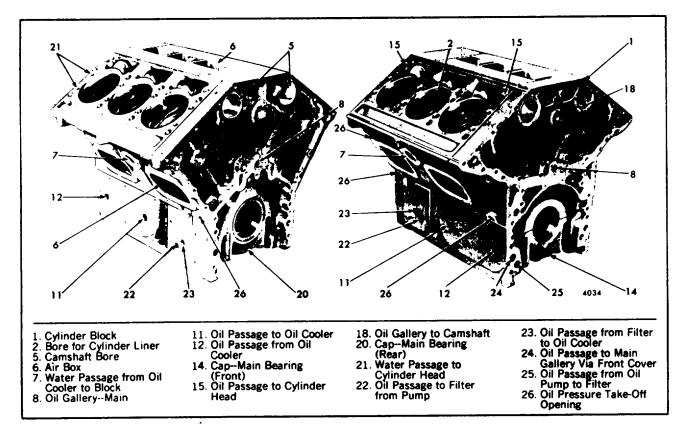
Cylinder Block (6V Cast Iron Cylinder Block Shown)
